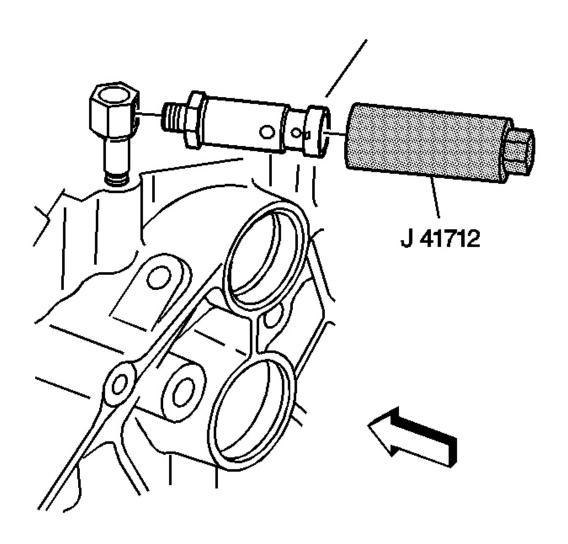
View Of Engine Oil Pressure Gage Sensor Courtesy of GENERAL MOTORS CORP.
